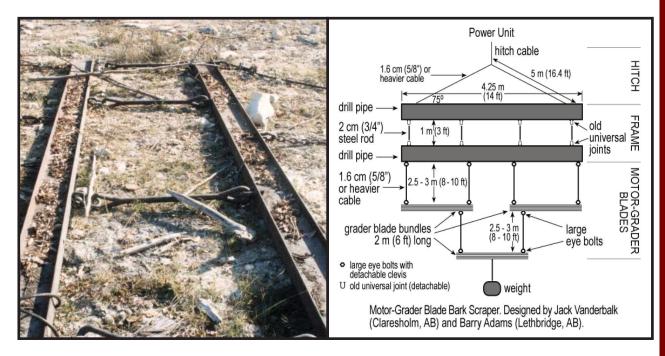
& 14. Drag beam and diagram of drag beam construction.
